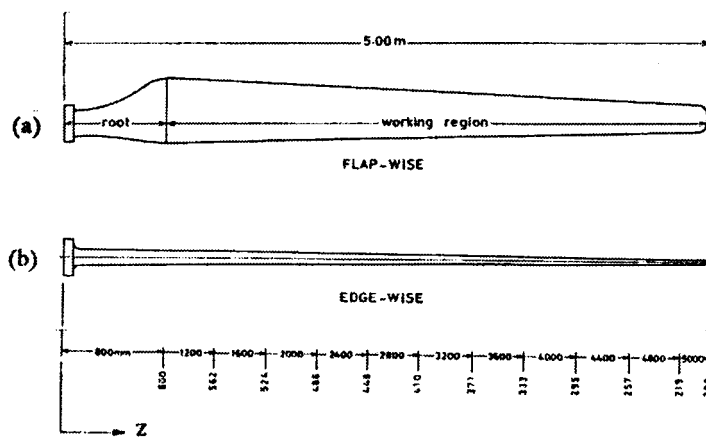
Viewing the rotor blade geometry: (a) Flap-wise, and (b) Edge-wise.
